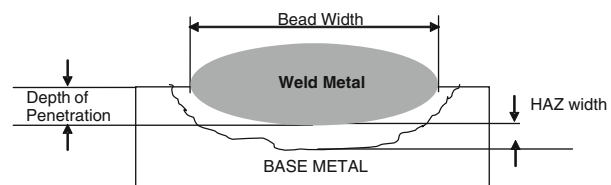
Schematic figure depicting weld bead shape parameters.
